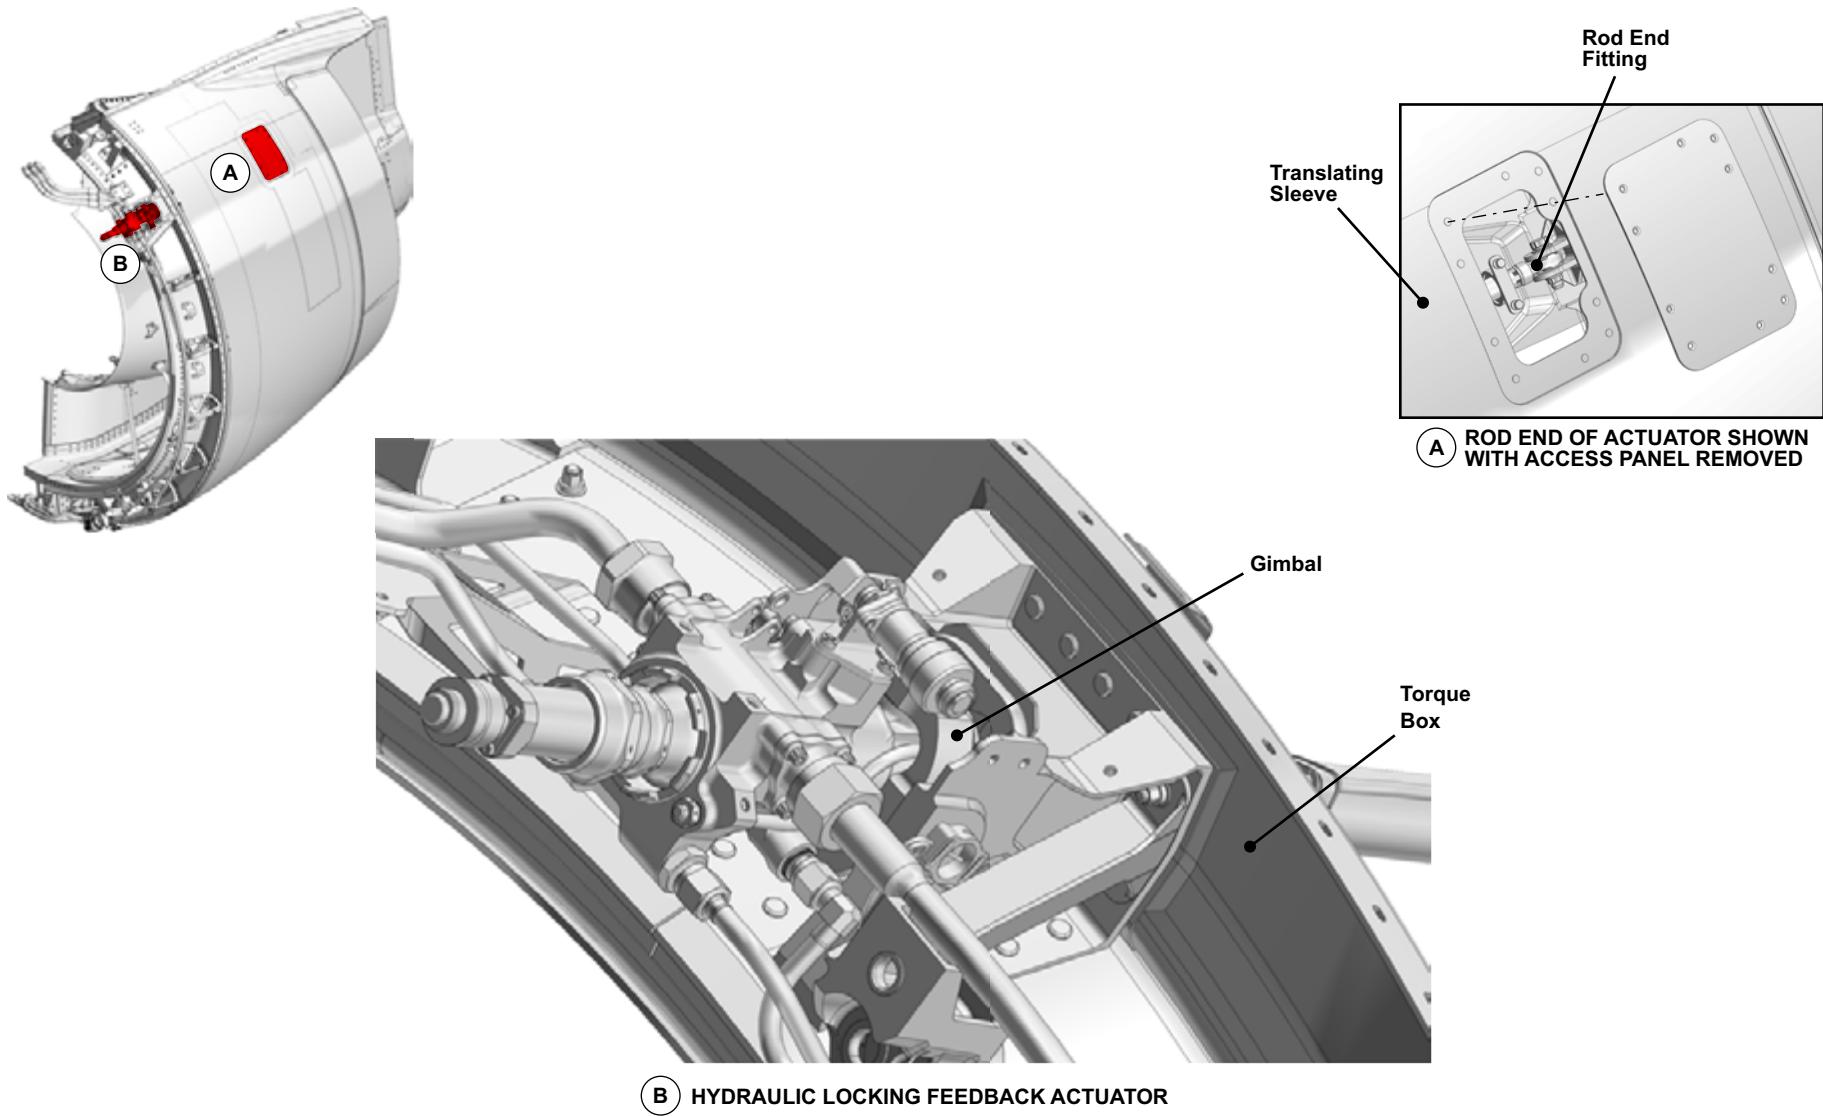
Locking Feedback Actuator and Locking Actuator Installation
